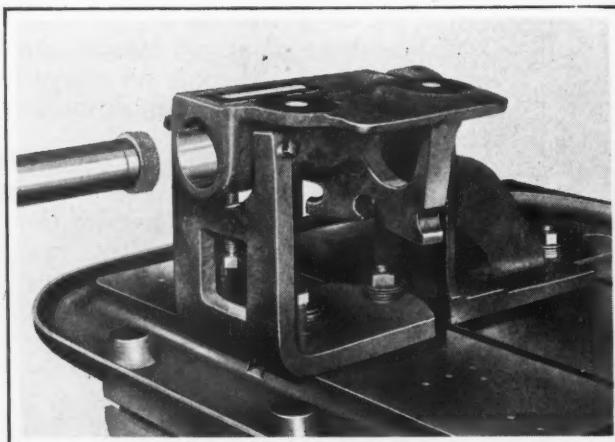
Grinding a Butterfly Fire-door Cylinder
